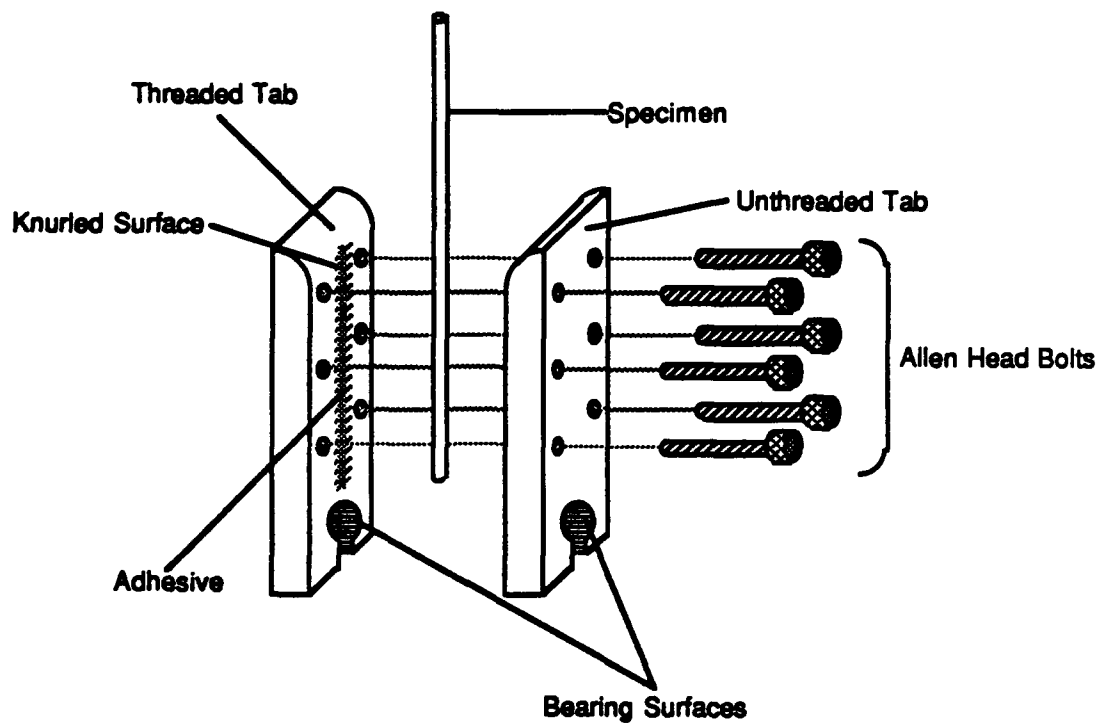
Schematic of the Aluminum Tensile Tabs Used in This Investigation for Precursor Wire Specimens
